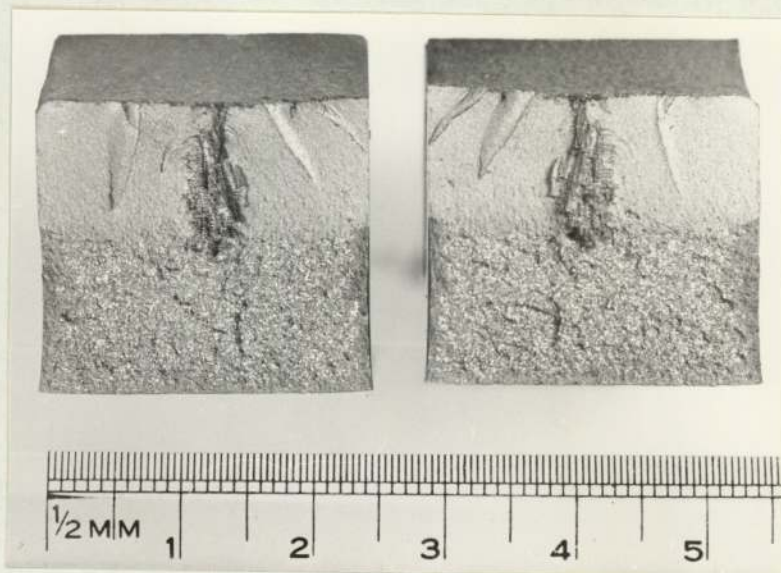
Material C Cast Specimen Fracture Surface.
